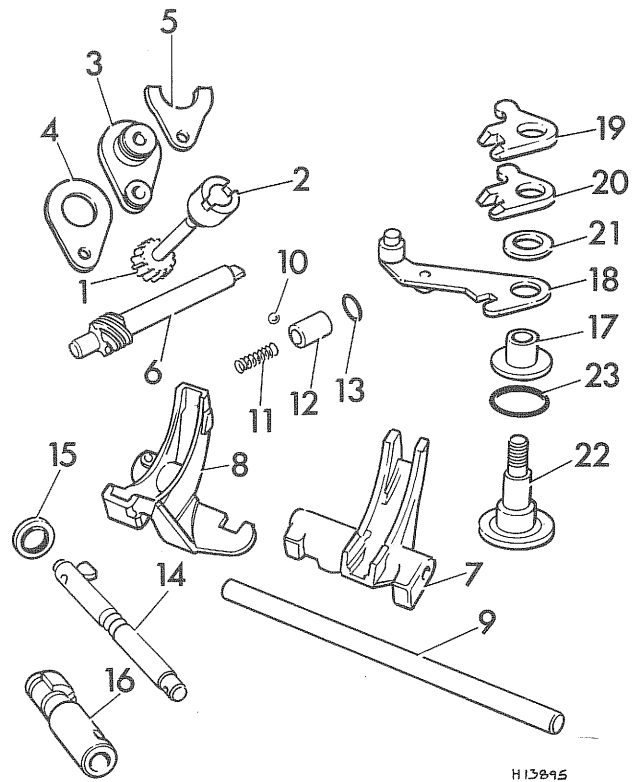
The rod-change transmission selector mechanism (Sec 4)
